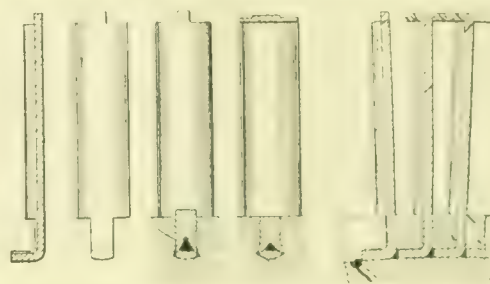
BELLIS & MORCOM IMPULSE BLADING.
